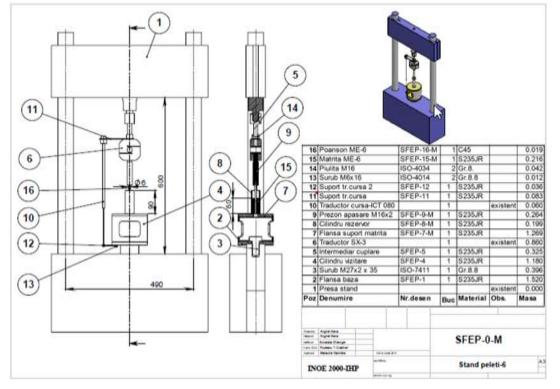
Overall drawing of the device for determining pellet extrusion forces
